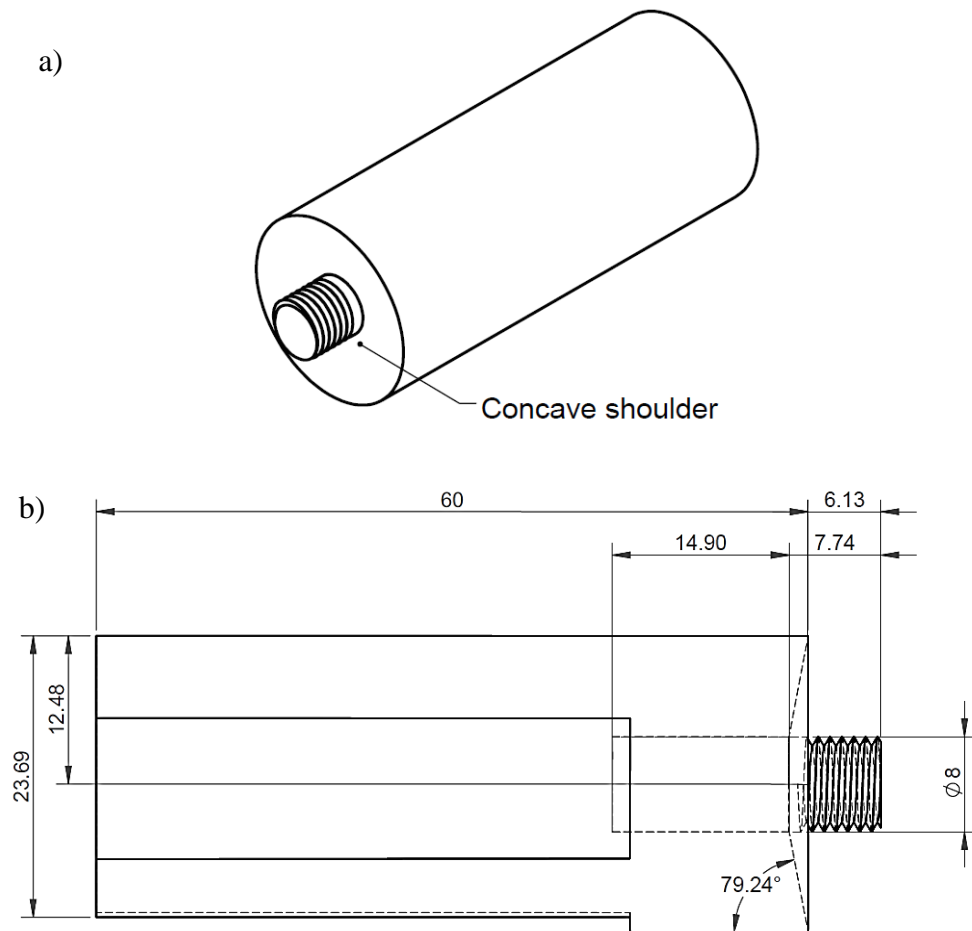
11 (a) Concave shoulder tool; (b) Tool dimension.
